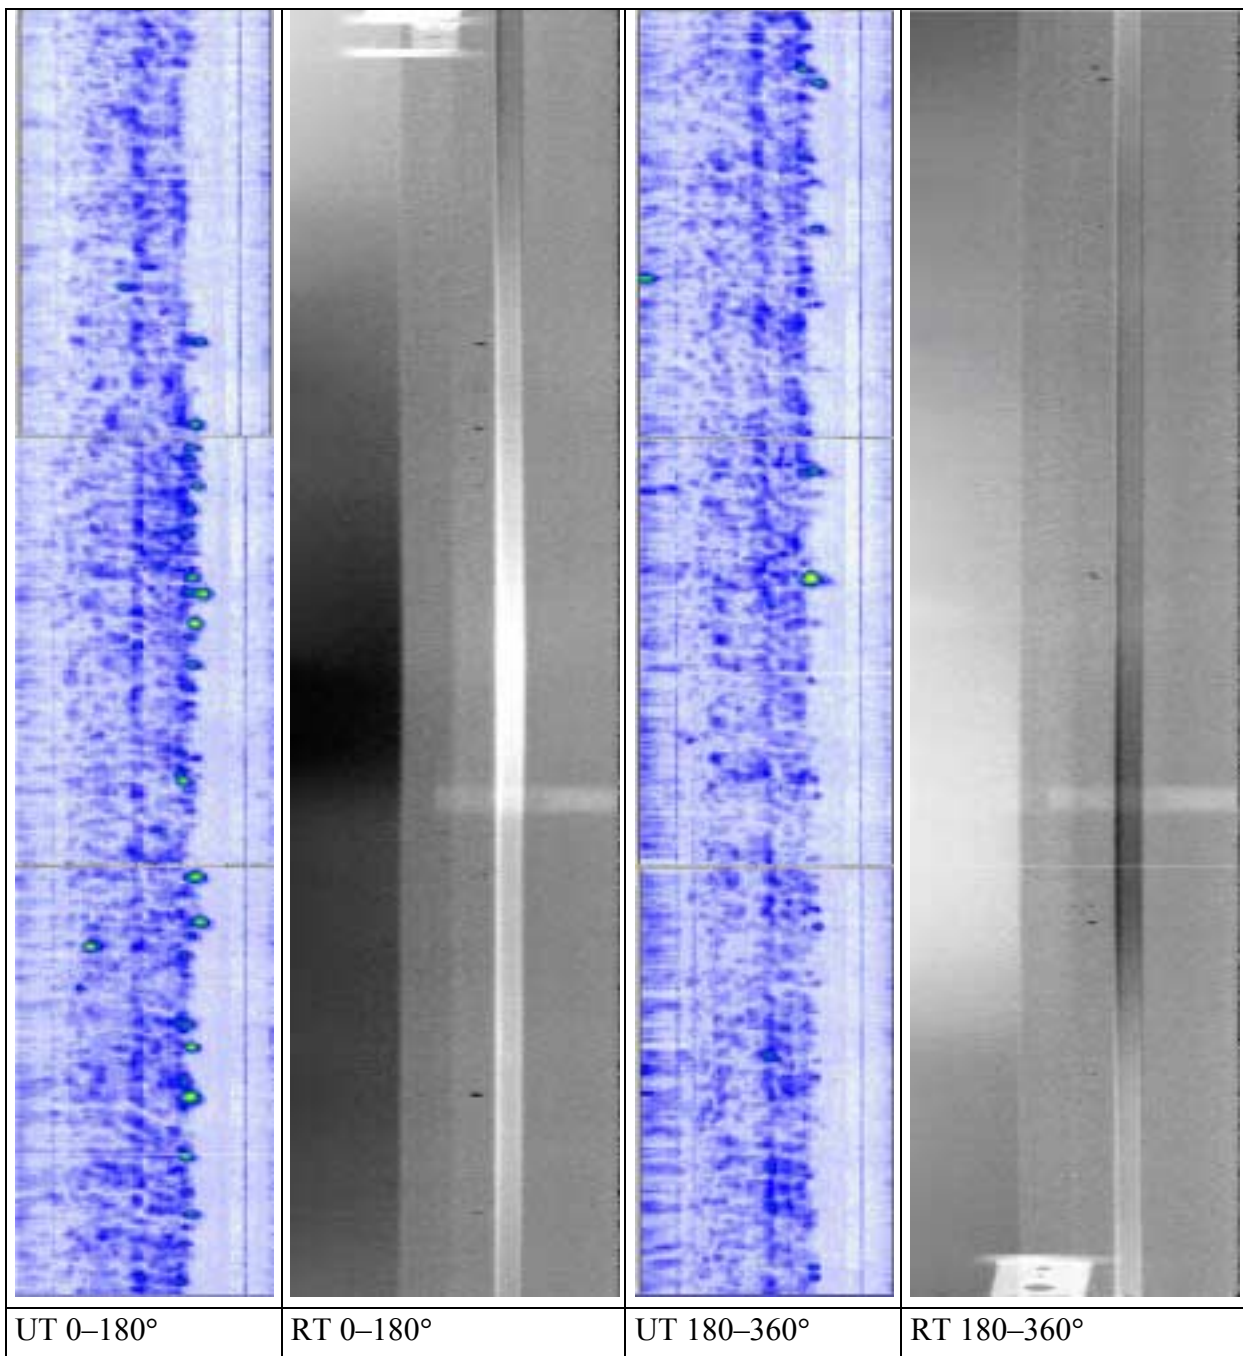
NDT of Lid weld 11 (weld 13 and 15 had a similar look).
